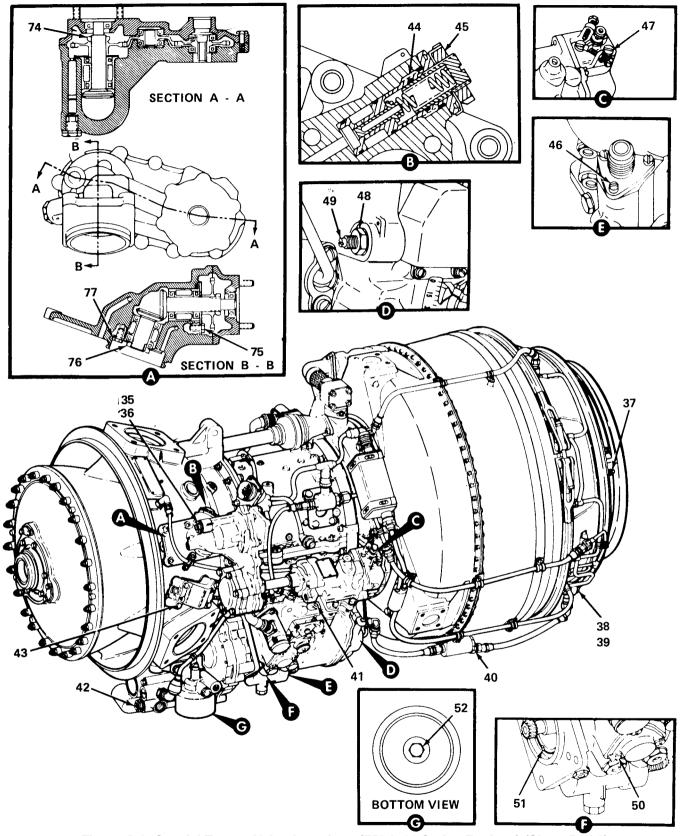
Special Torque Value Locations (T53-L-11 Series Engines) (Sheet 5 of 6)
